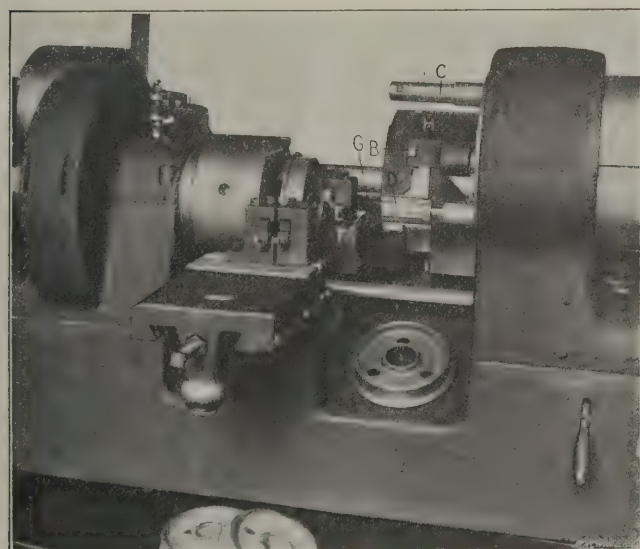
Cleveland Convertible Automatic Turret Machine having Special Equipment for Turning Flanged Wheel *C*, Fig. 1
